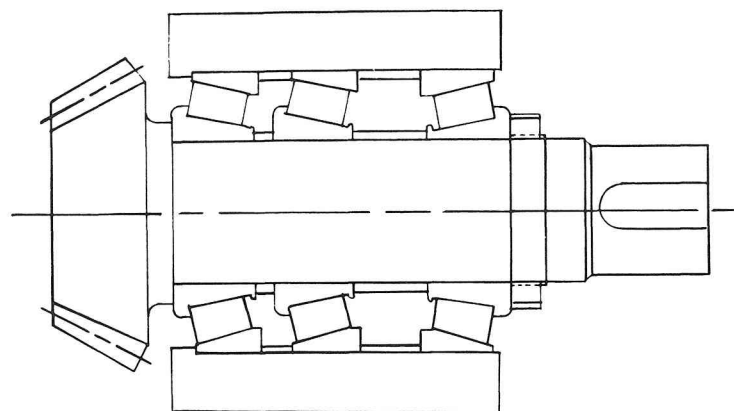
Tapered roller bearings in overhung-mounted configuration.
